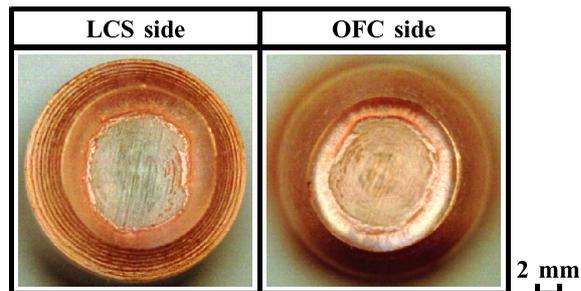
Example of fractured surfaces of joint tensile test specimens after tensile testing; friction pressure of 90 MPa.
